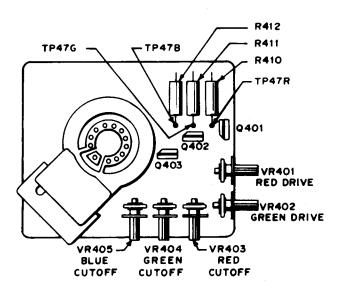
Neck Board—Component Side (With Horizontally Mounted CRT)
